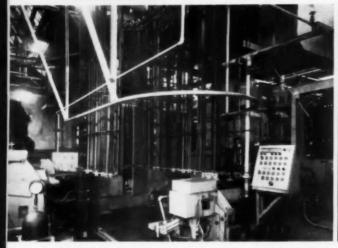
Magazines such as this one are provided on inline machine lines to store high volume parts between operations. The group shown here can store up to 1800 two-jet throttle body castings.
